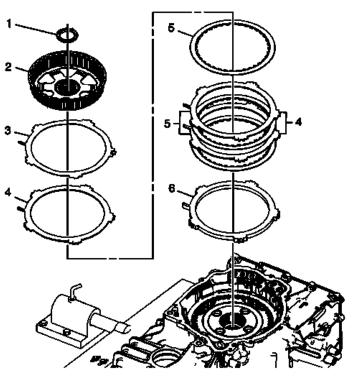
Identifying Case Cover, 3-5-Reverse & 4-5-6 Clutch Housing Courtesy of GENERAL MOTORS COMPANY
